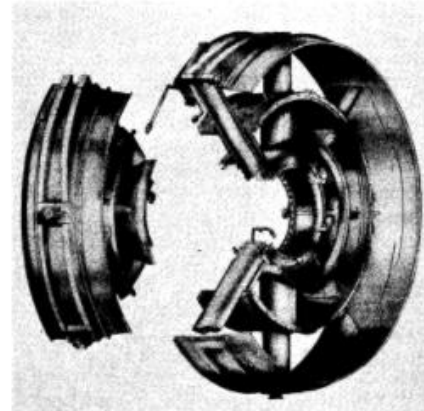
CUTAWAY OF CJ805-21 FAN FRONT FRAME
